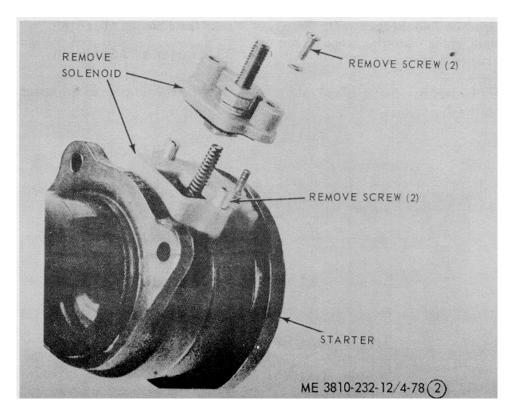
Crane engine starter and solenoid, removal and installation. Sheet 2 of 3.
